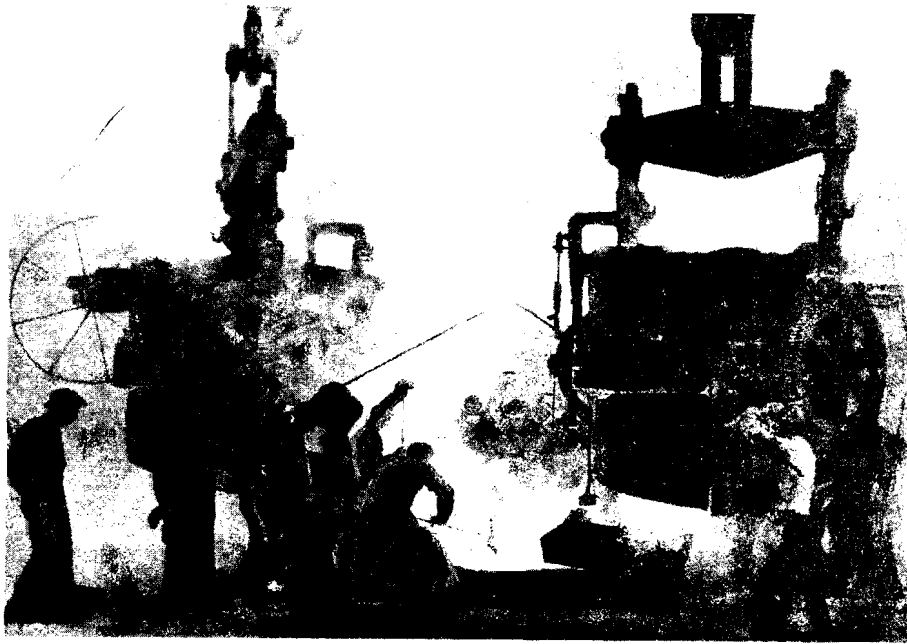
A Bessemer Converter for Making Steel, 1900
